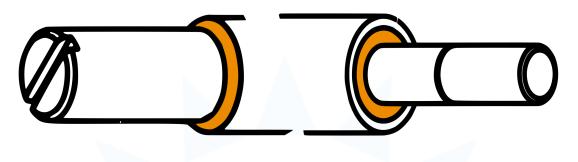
Weld the two thread shafts onto the shaft
